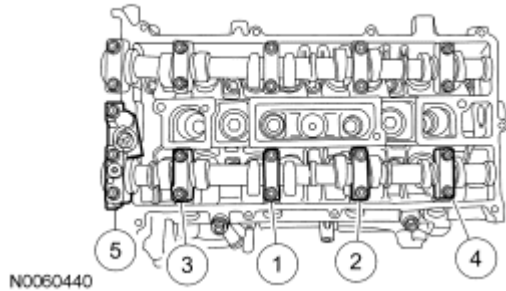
Identifying Tightening Sequence Of Intake Camshaft Bearing Caps Bolts
